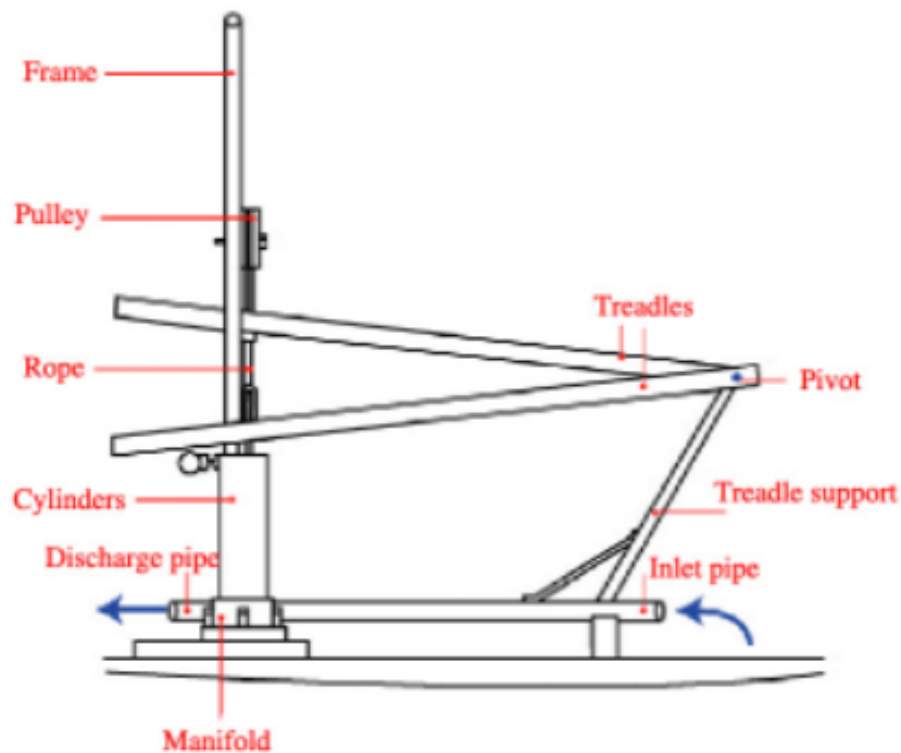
Treadle Pump Design (Kay & Brabben, 2000)
